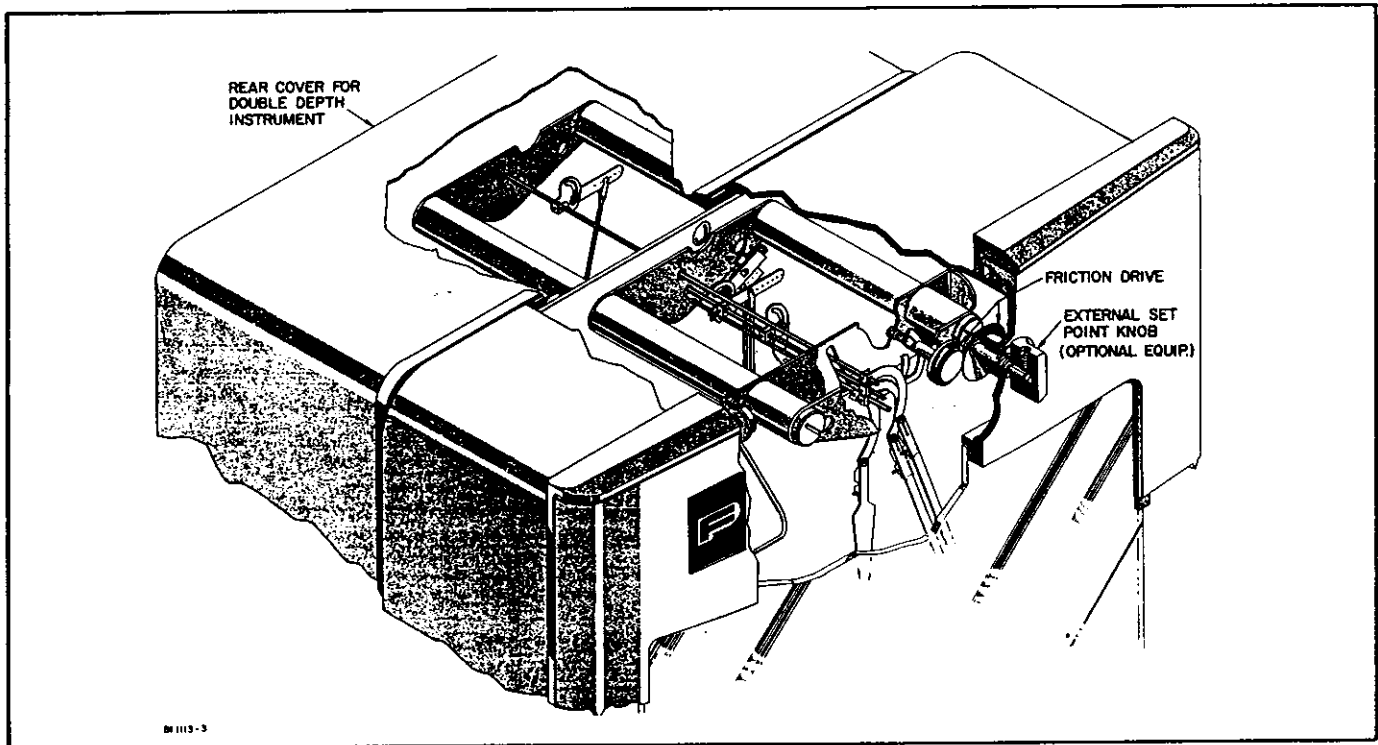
DOUBLE DEPTH INSTRUMENT SPINDLE ASSEMBLY
